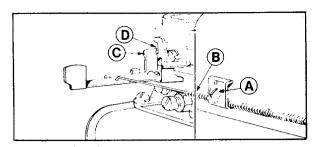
THROTTLE CONTROL ADJUSTMENT
